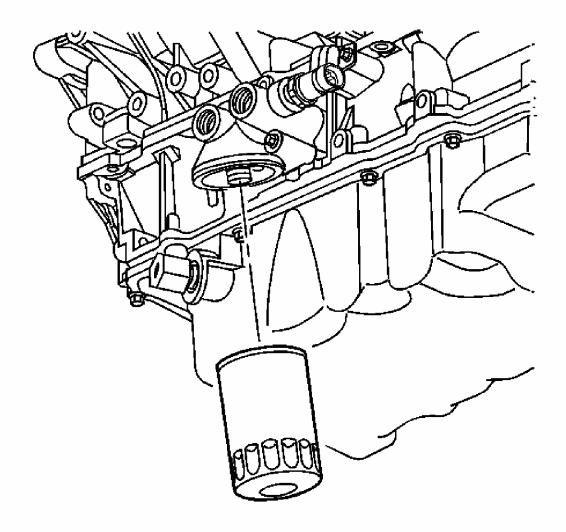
View Of Oil Filter (with Oil Cooler) Courtesy of GENERAL MOTORS CORP.
